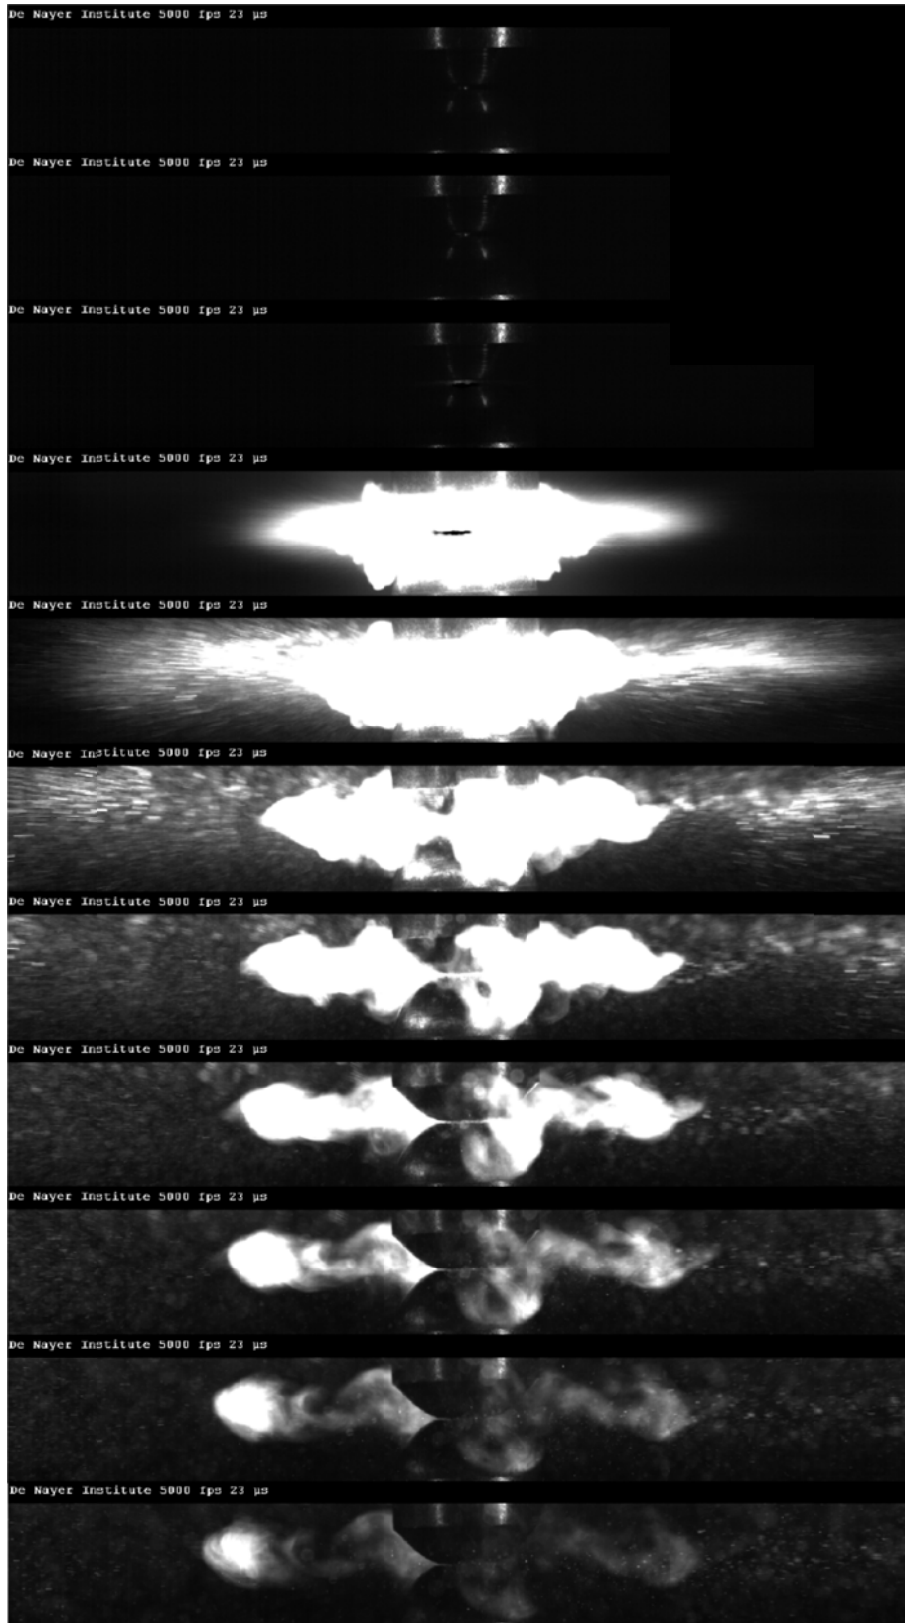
Exploding button test ARO pneumatic, no intermediate layers (part 1)
